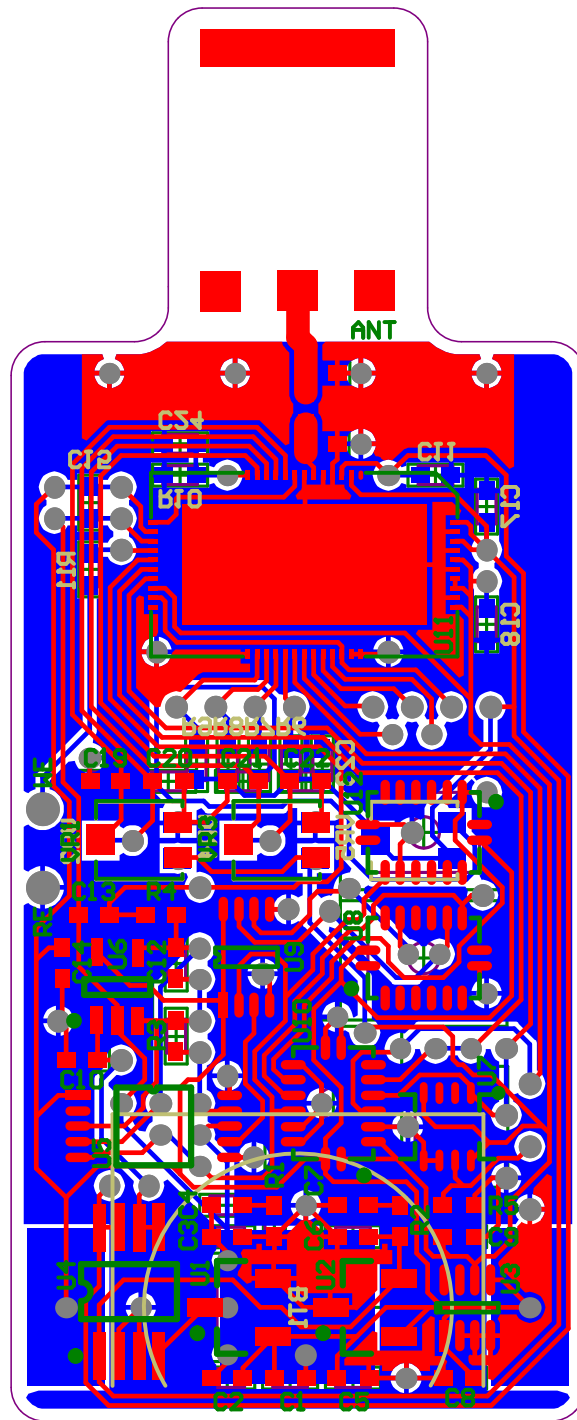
Board layout of the miniaturized wireless device in Ch. 3.
